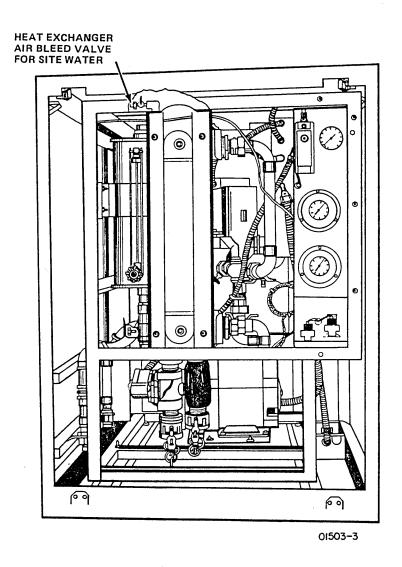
Air Bleed Valve 102-L/min (27-gal/min) Unit
